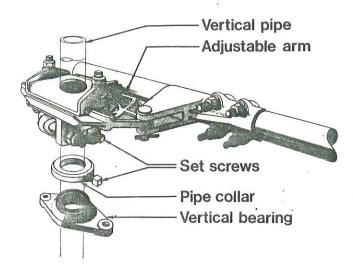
Adjustable arm assembly. Pipe collar must support full weight of pipe.
